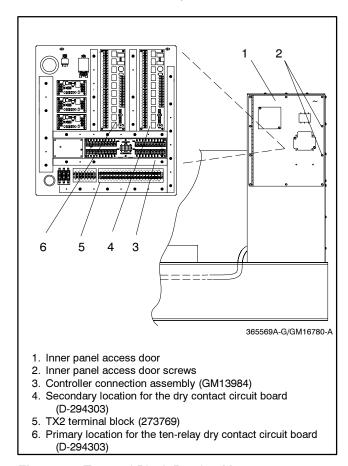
Terminal Block Bracket Mounting in Junction Box (450–2000 kW)
